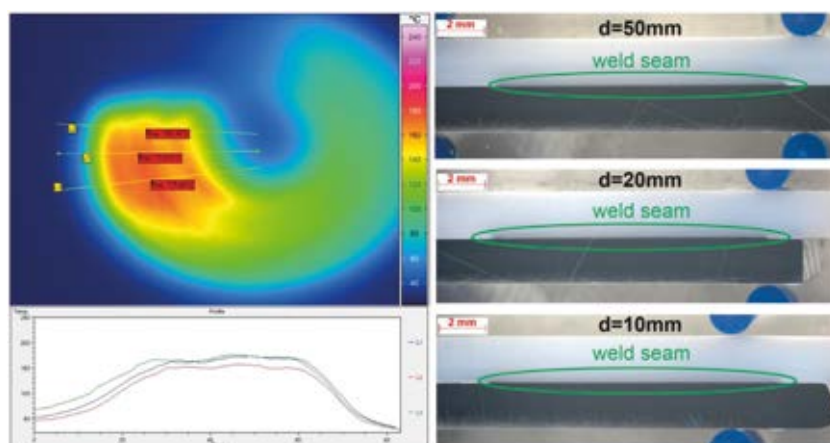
Inspection of the weld seam with a thermal camera and the cross-section [4]
